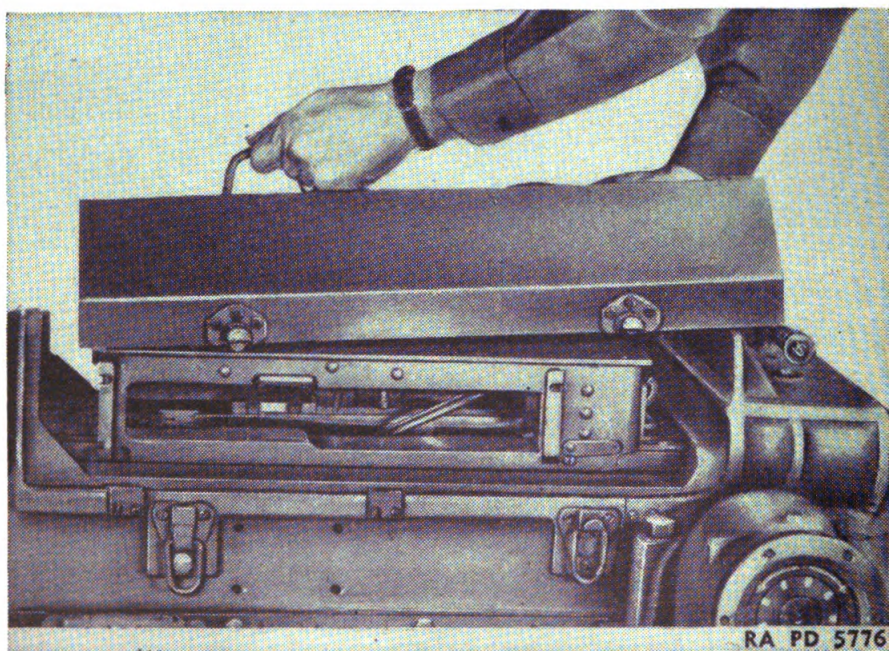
Removing cradle shield cover from M3A1 carriage.
